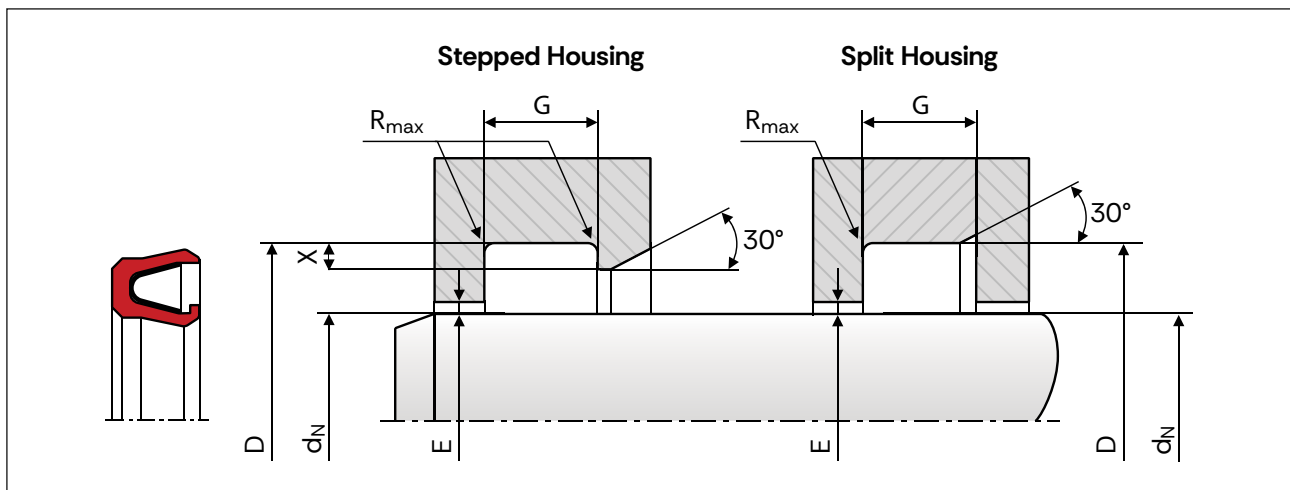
Assembly drawing for HaaSC Dynamic R32.
